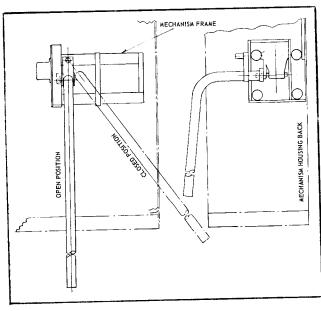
Assembly of Hand Closing Lever on Mechanism
